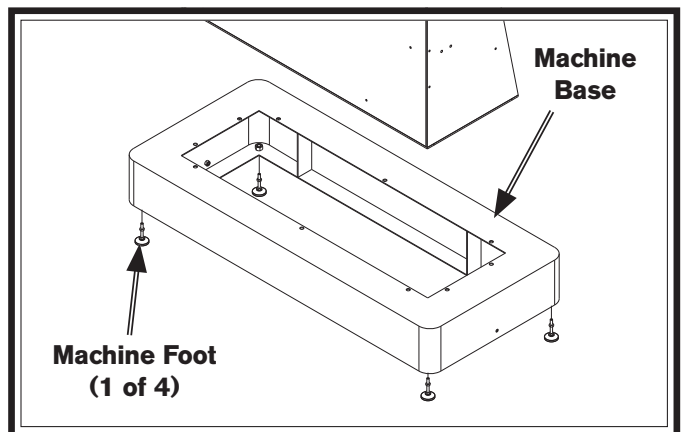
Machine feet mounting locations (machine base separated for clarity).
